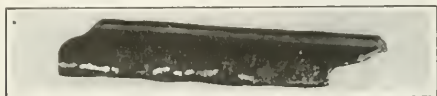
Casting that is to be inserted in Place of Broken-out Piece in Fig. 13
